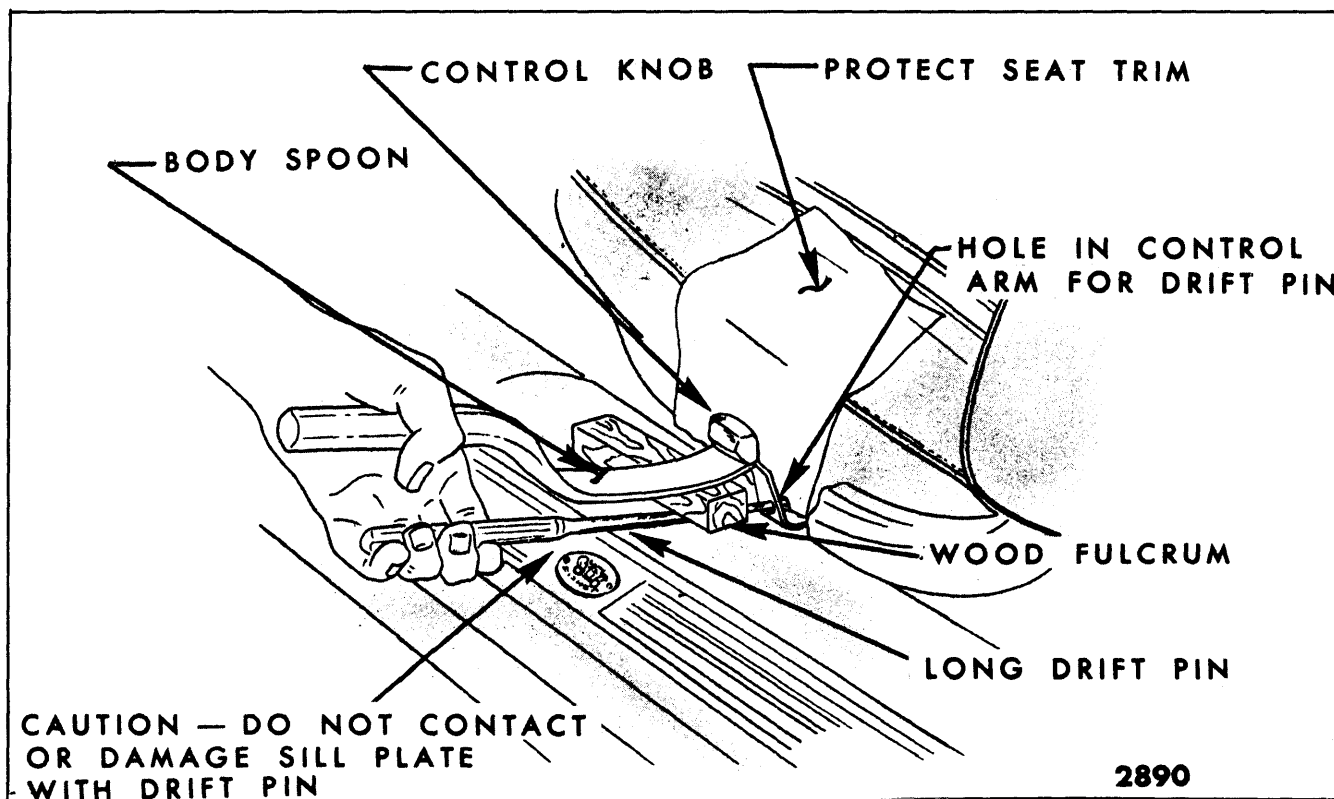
Front Seat Adjuster Control Knob - Removal
